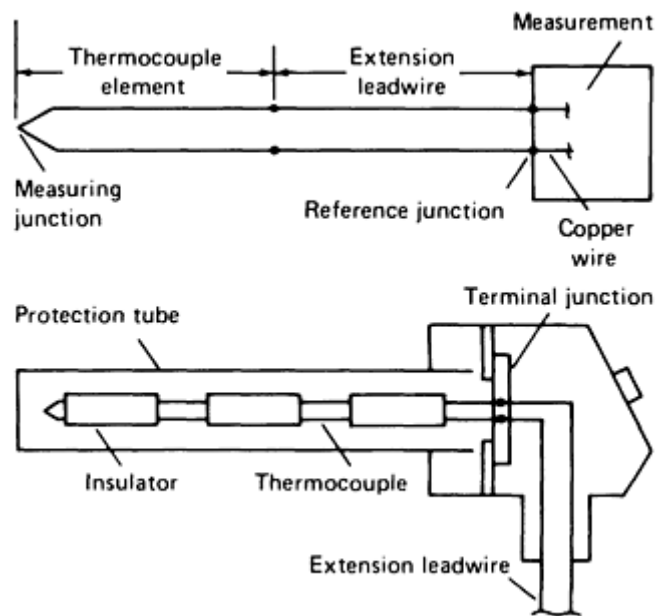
Simple thermocouple (upper view); and cutaway of a thermocouple assembly (lower view)
